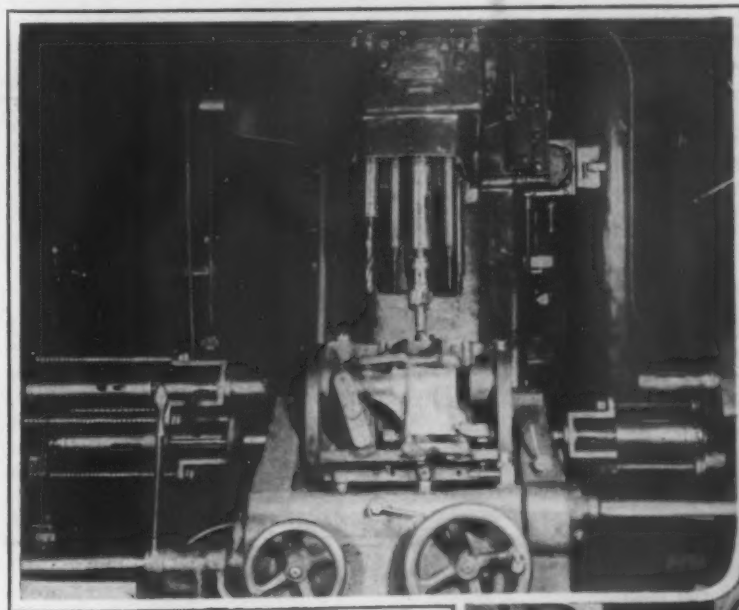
(Below) Five Holes Are Drilled In Housing Casting and at the Same Time Four Faces Are Straddle Milled In the Special Machine, Part of Which Is Shown. The main head carries the work to the milling cutters and the drills are carried in an auxiliary head
